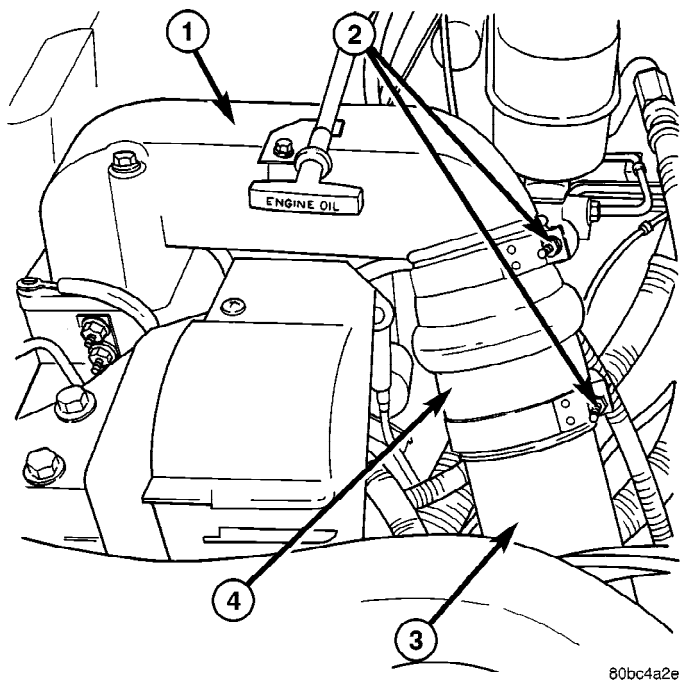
INTAKE MANIFOLD TO AIR INLET DUCT RUBBER SLEEVE
